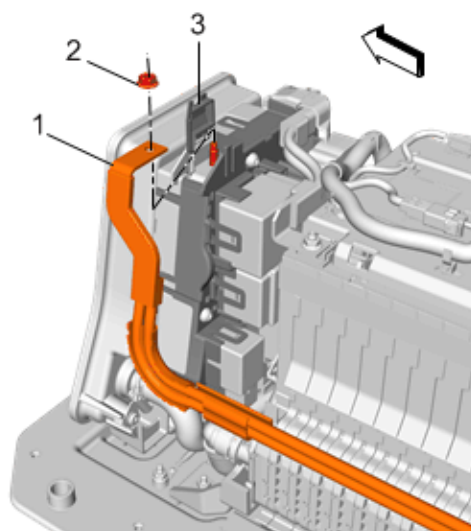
Terminal Cover, High Voltage Battery Positive Cable And Fastener
